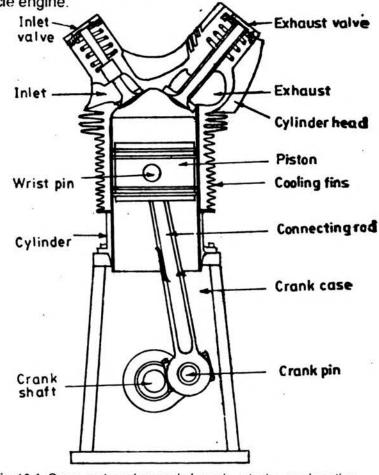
Cross-section of air cooled, single-cylinder, single-acting, vertical petrol engine.
